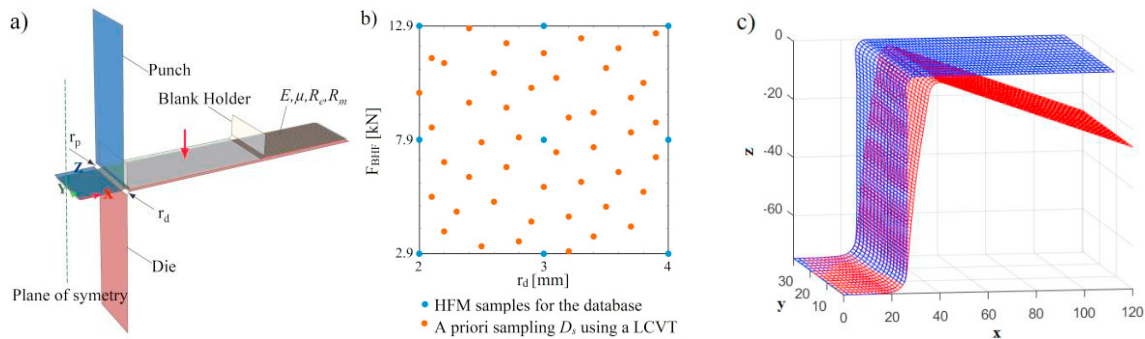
(a) Numerical model of the draw bending process; (b) Design space; (c) Example of U-shape after springback.
